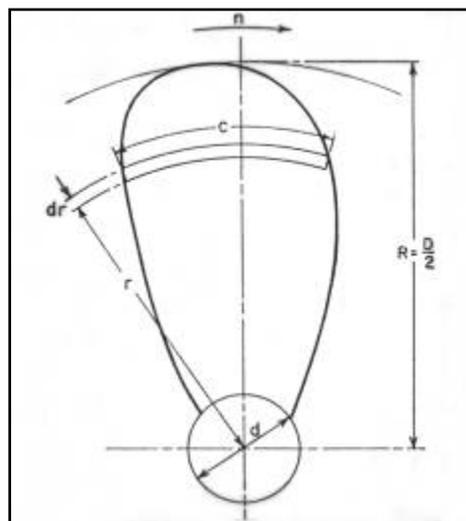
Sketch of a Typical Propeller Blade (From [92])
